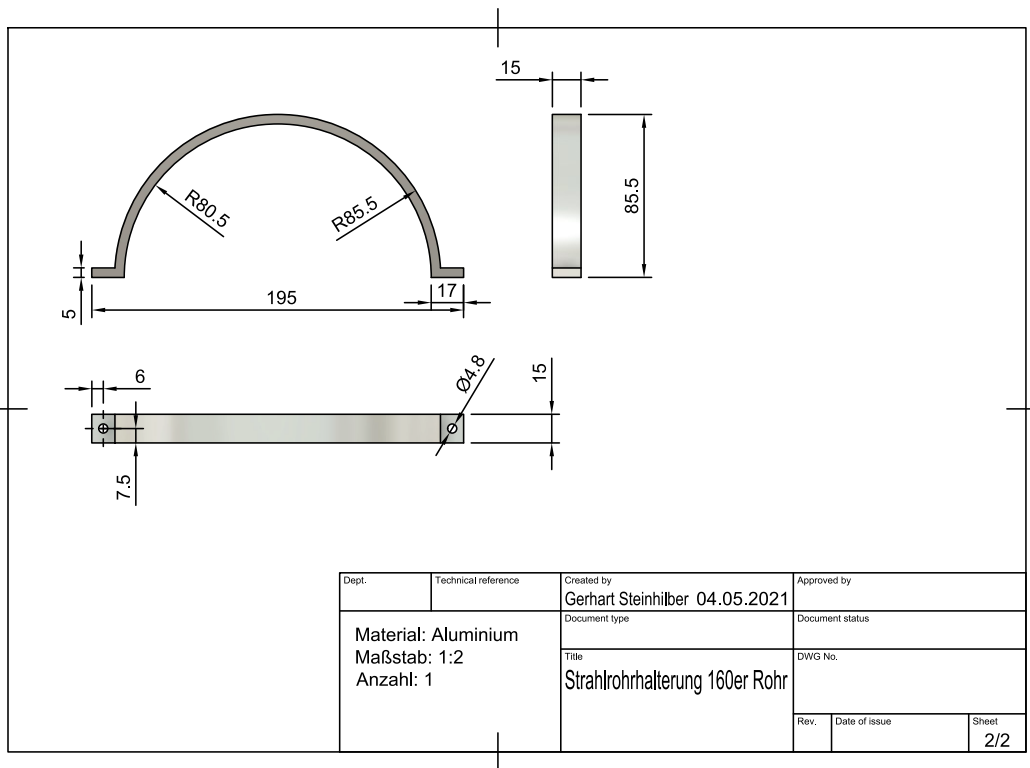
Technical drawing of the upper half of the large beam pipe holding clamp.
